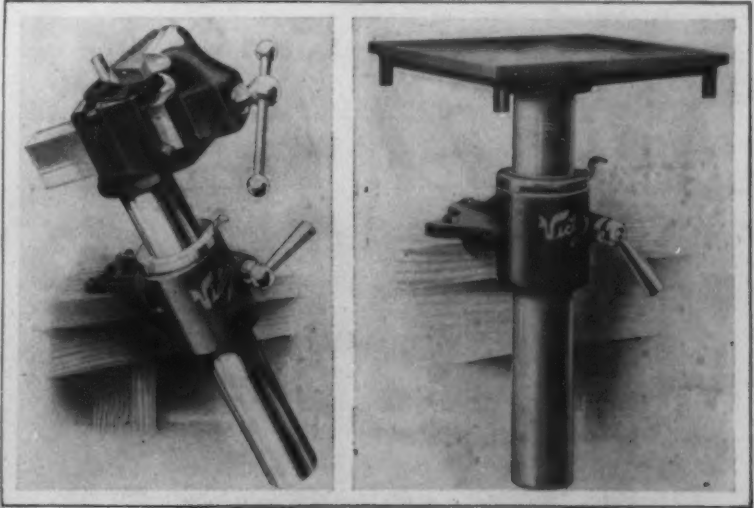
A Universal Vise Fig. 2—A Surface Table
